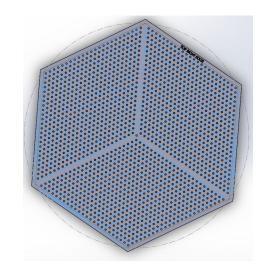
Hexagonal Detector Wafer Designed by Using Solidworks
